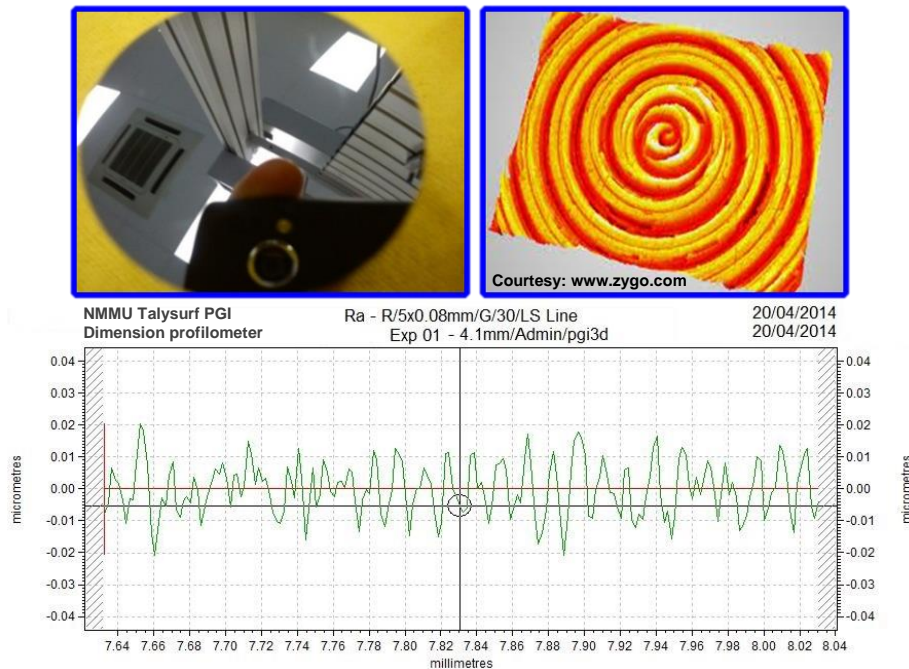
Ultra-precision machined lens with 3D image and low form accuracy
